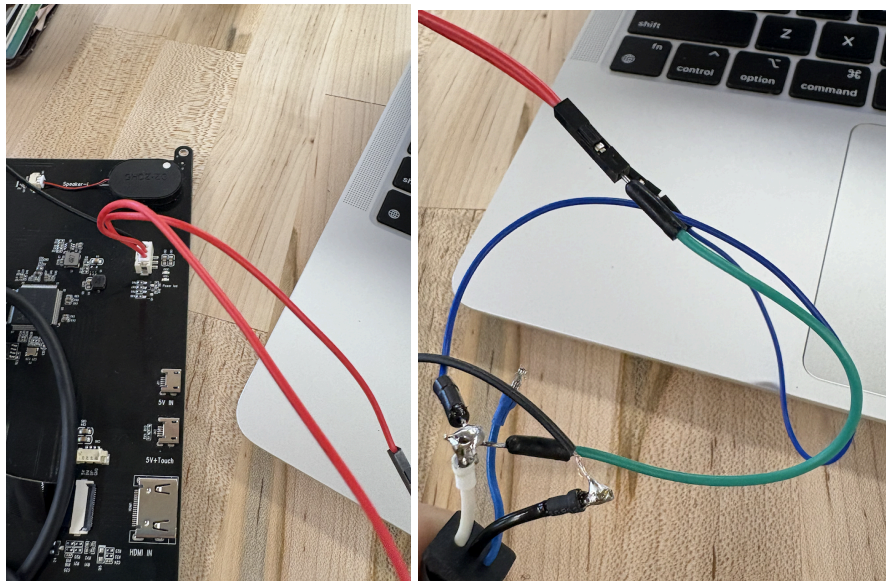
Special USB-C End Soldered to 3-Pin GPIO Cable
